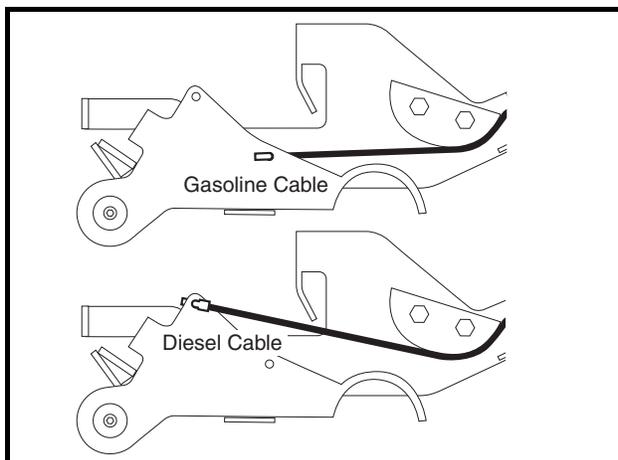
16 Z-Shaped Cable End in Hole at Pedal
